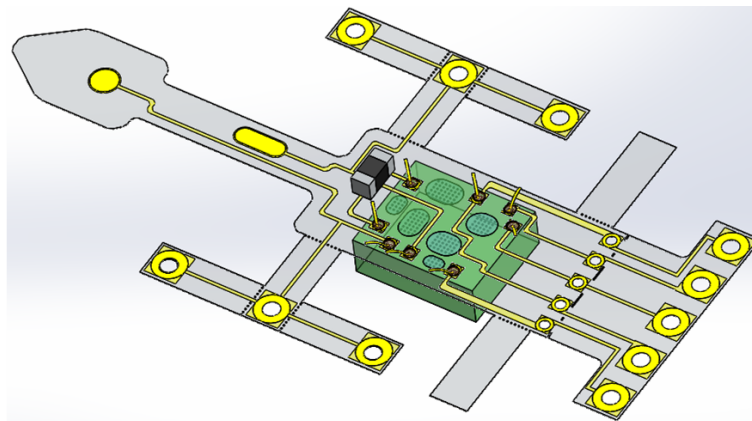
3D drawing of the assembled bare die and discrete resistor.
